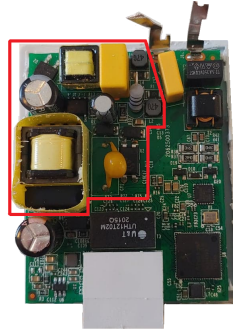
Deconstructed TL-PA4010, PCB layout, high voltage side highlighted.
